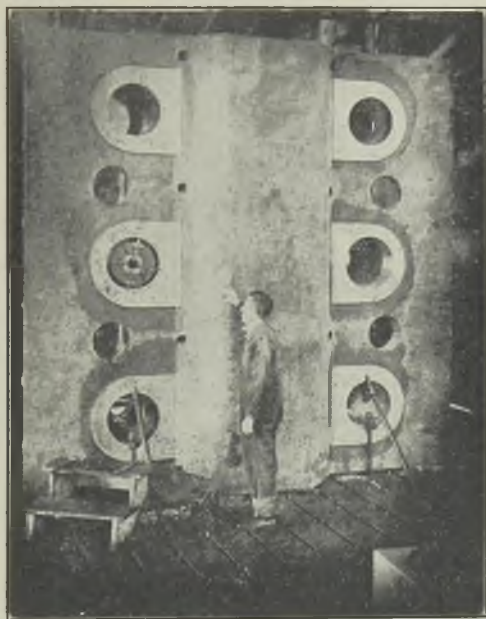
MACHINING A 60-TON STEEL CASTING
